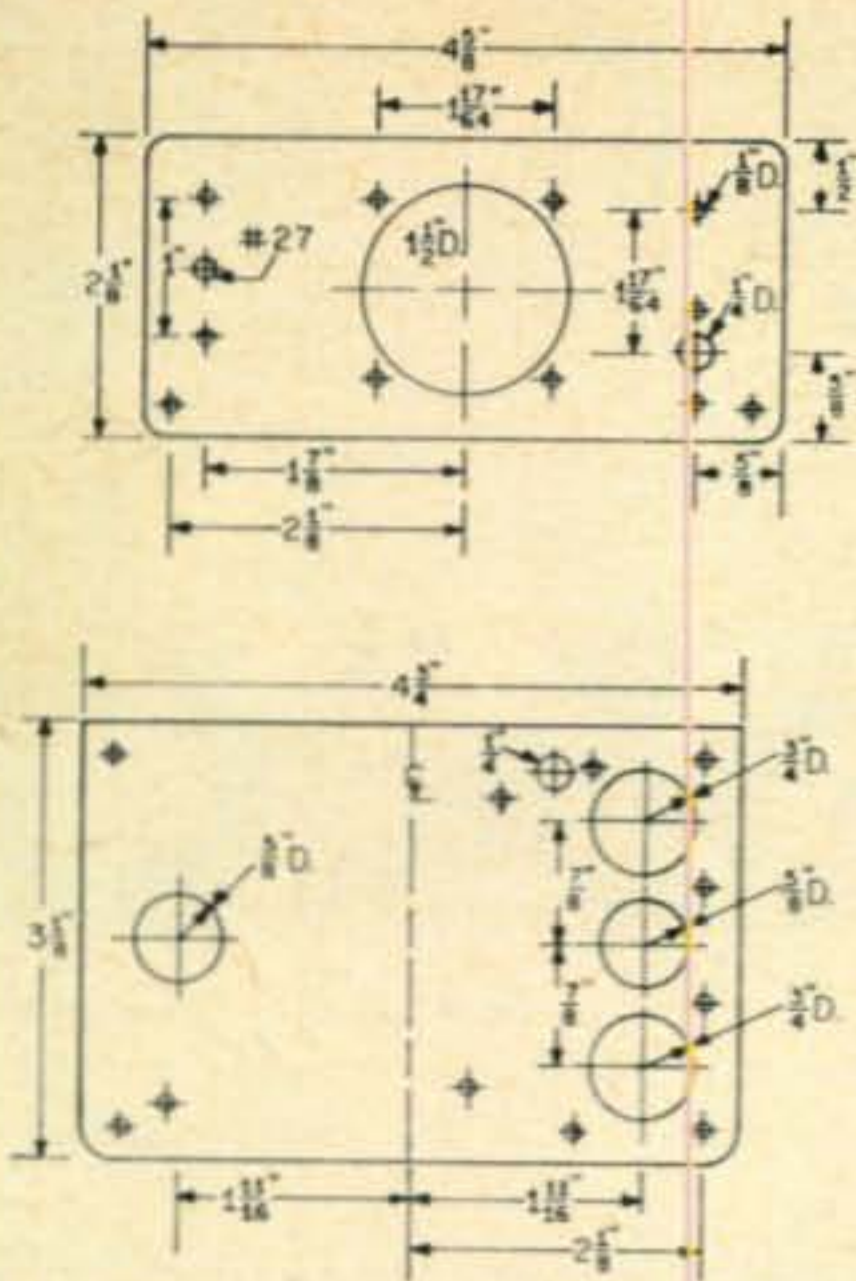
Dimensions of the front and back plates for the ARC-Port.
